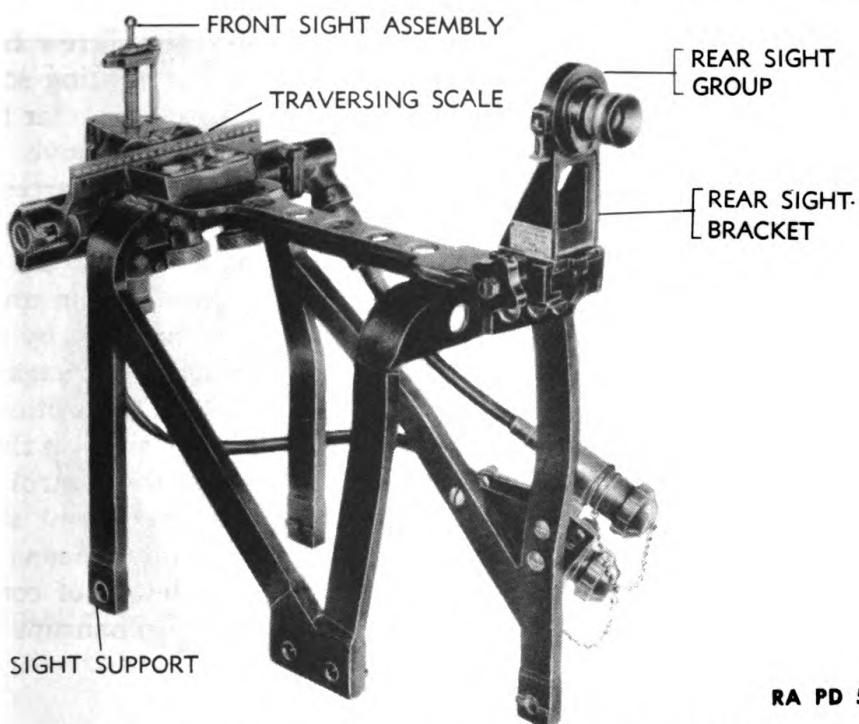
Front and Rear Sight Groups Mounted on Sight Support – Left Side View – A.A. Machine Gun Mount, Cal. .50, M2
